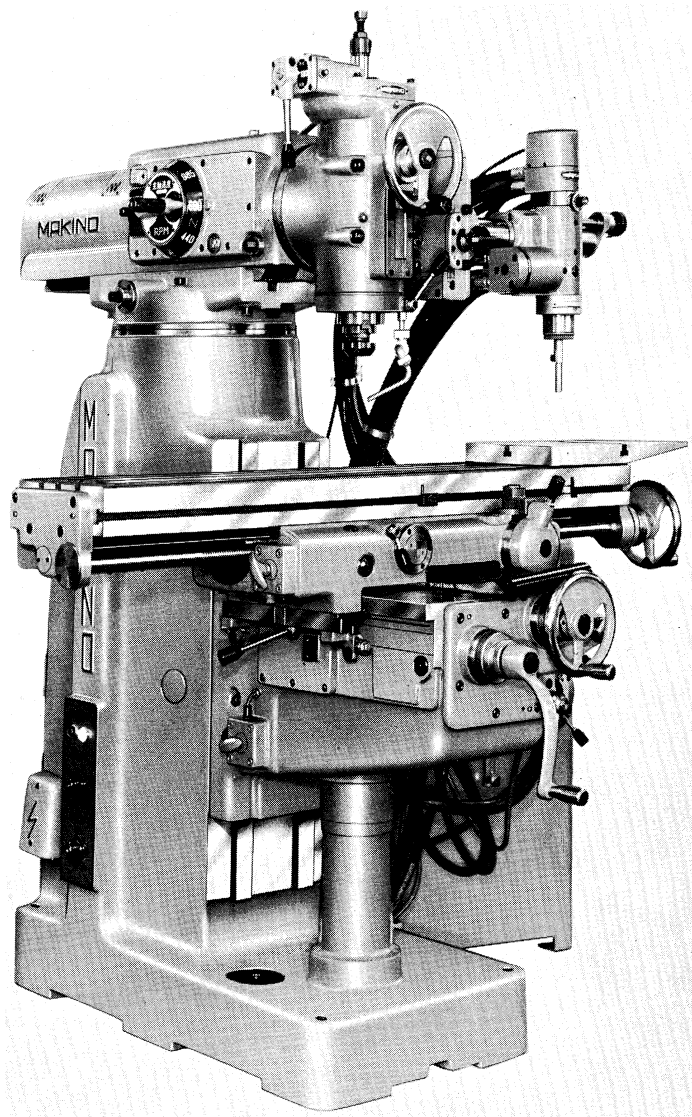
Universal Copying Milling Machine, Model KU 3, by Makino Vertical Milling Machine Company.
